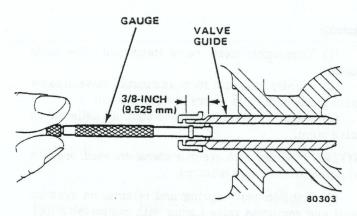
B-51 Valve Stem-to-Guide Clearance Measurement with Telescoping Gauge
